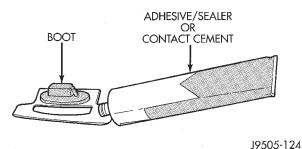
Applying Adhesive To Parking Brake Lever Boot
